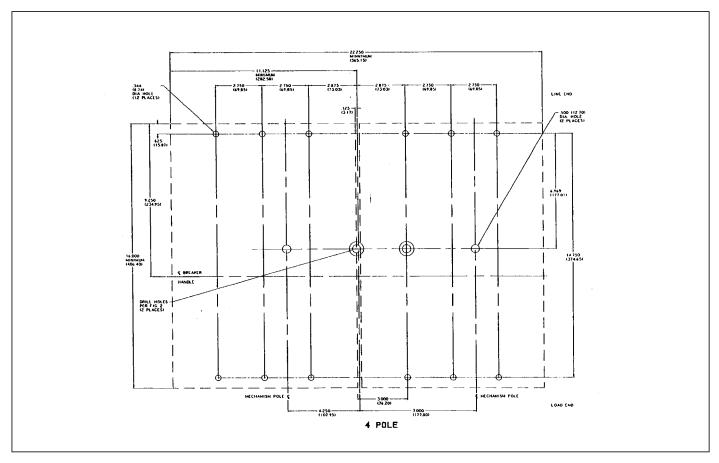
N-Frame 4-Pole Circuit Breaker Mounting Panel Holes Sizes and Dimensions
